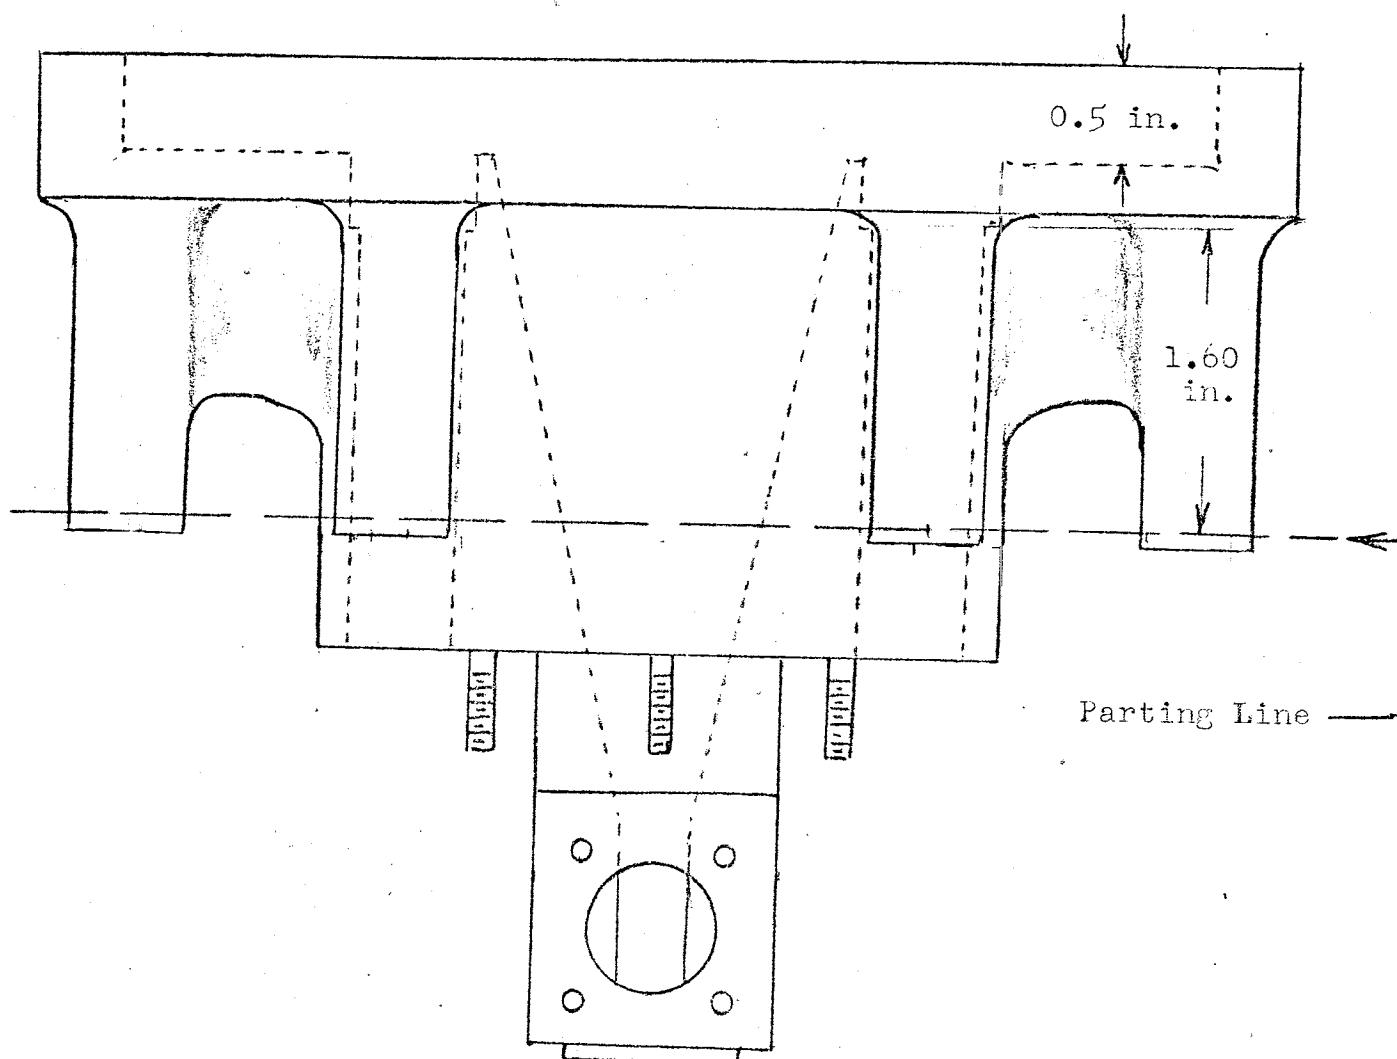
Unmodified cathode casting stripped showing parting line and important dimensions.
